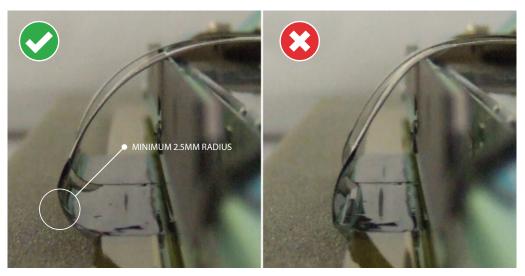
FLEXIBLE CABLE BENDING AT SENSOR EDGE
